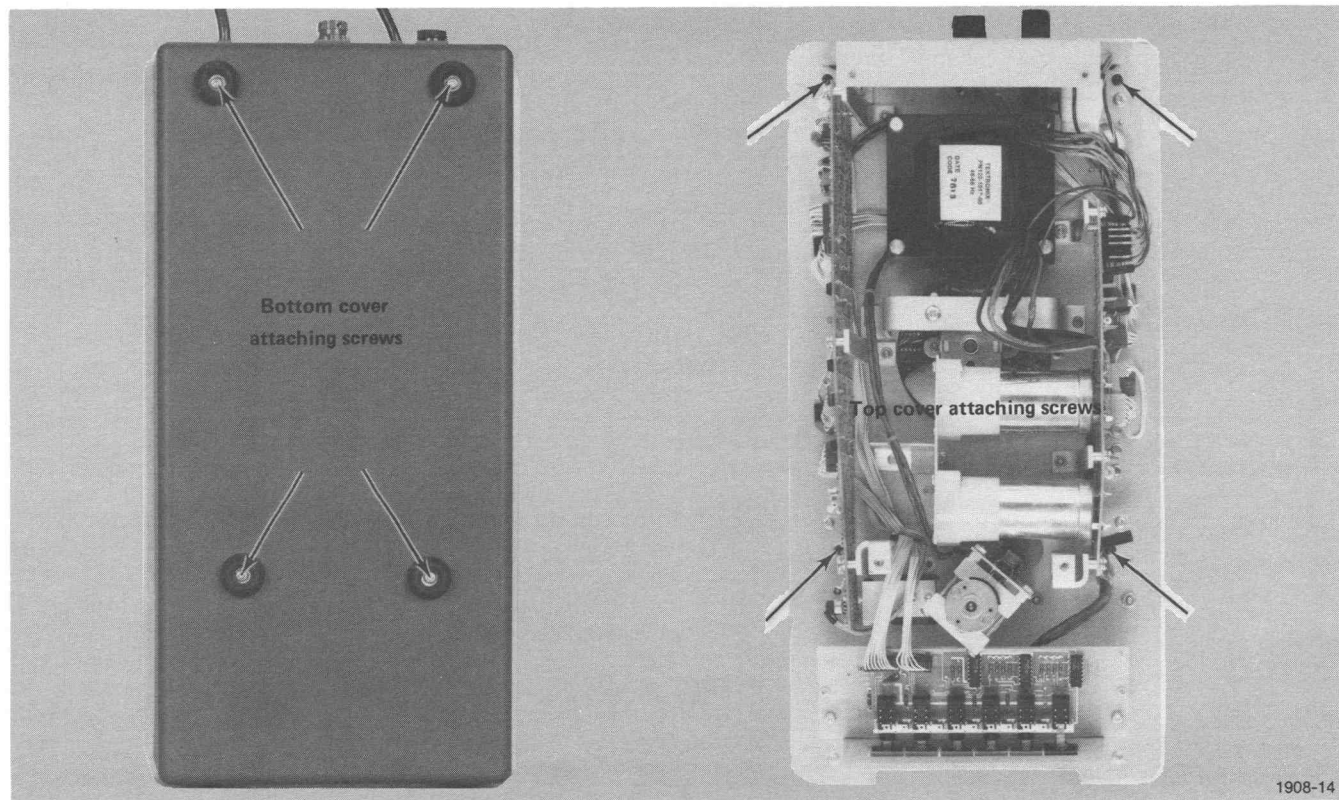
Cover attaching screws. The unit is viewed from the bottom.
